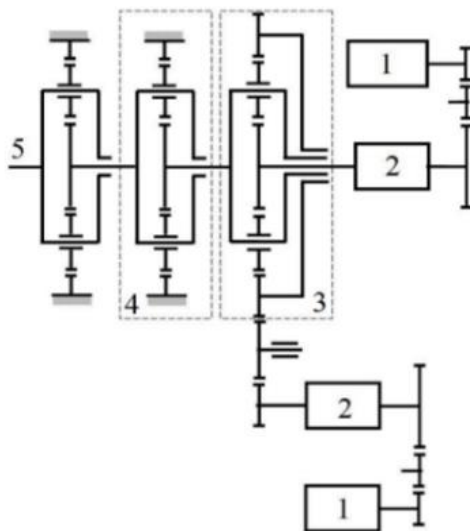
An example of drive of docking mechanism as a kinematic design: planetary unit-4,5; planetary gear-3; motors-1,2 (Golubev, 2019).
